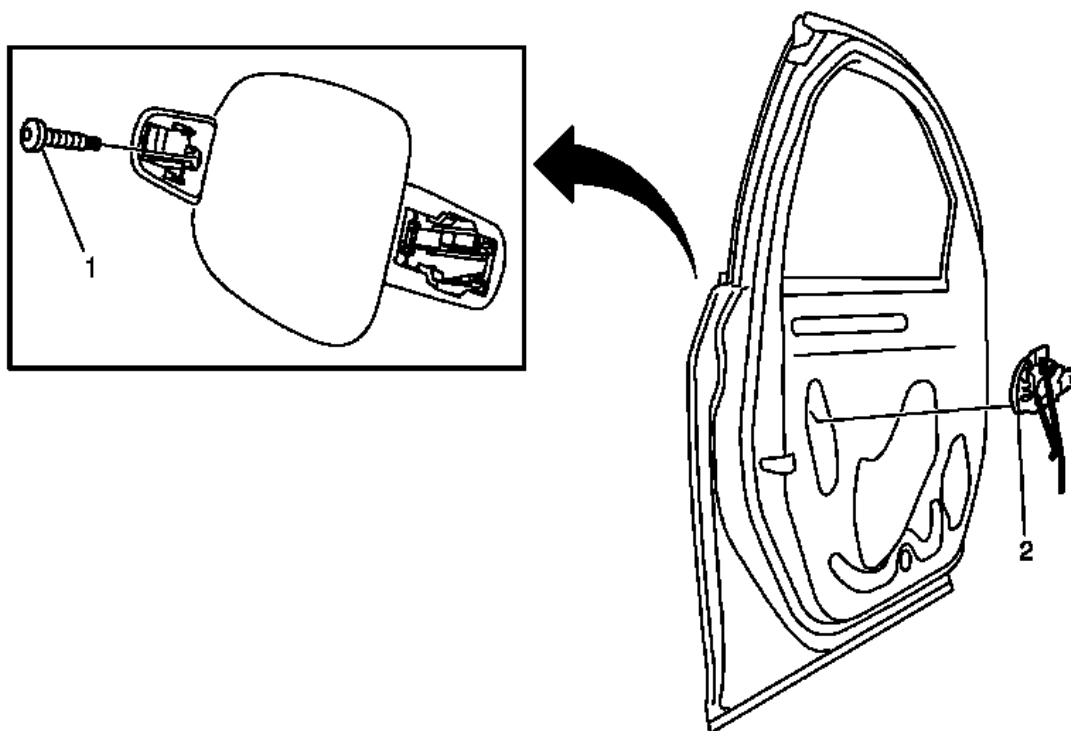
Front Side Door Outside Handle Bracket (Base)
